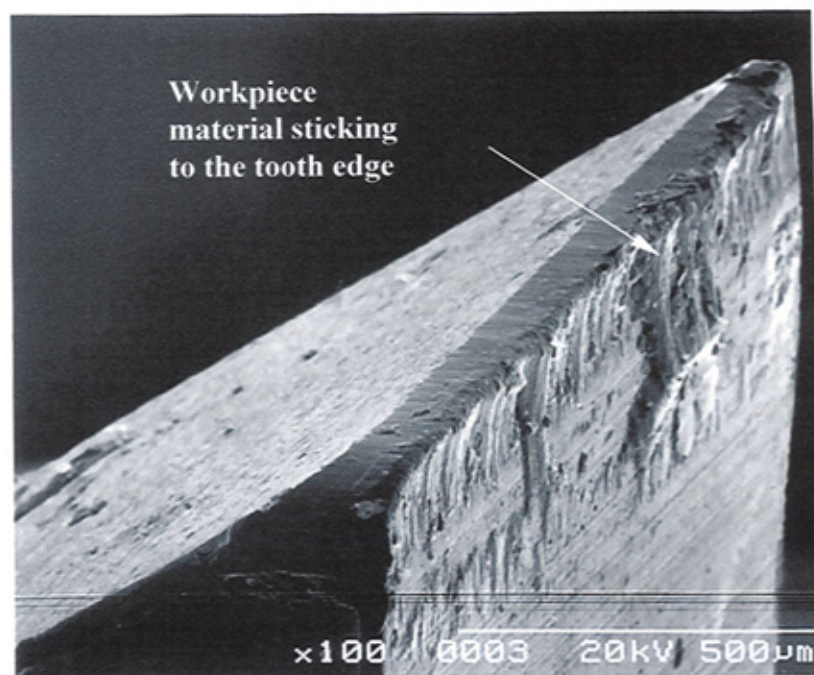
Photomicrograph of single tooth sample used for Workpiece-Y
